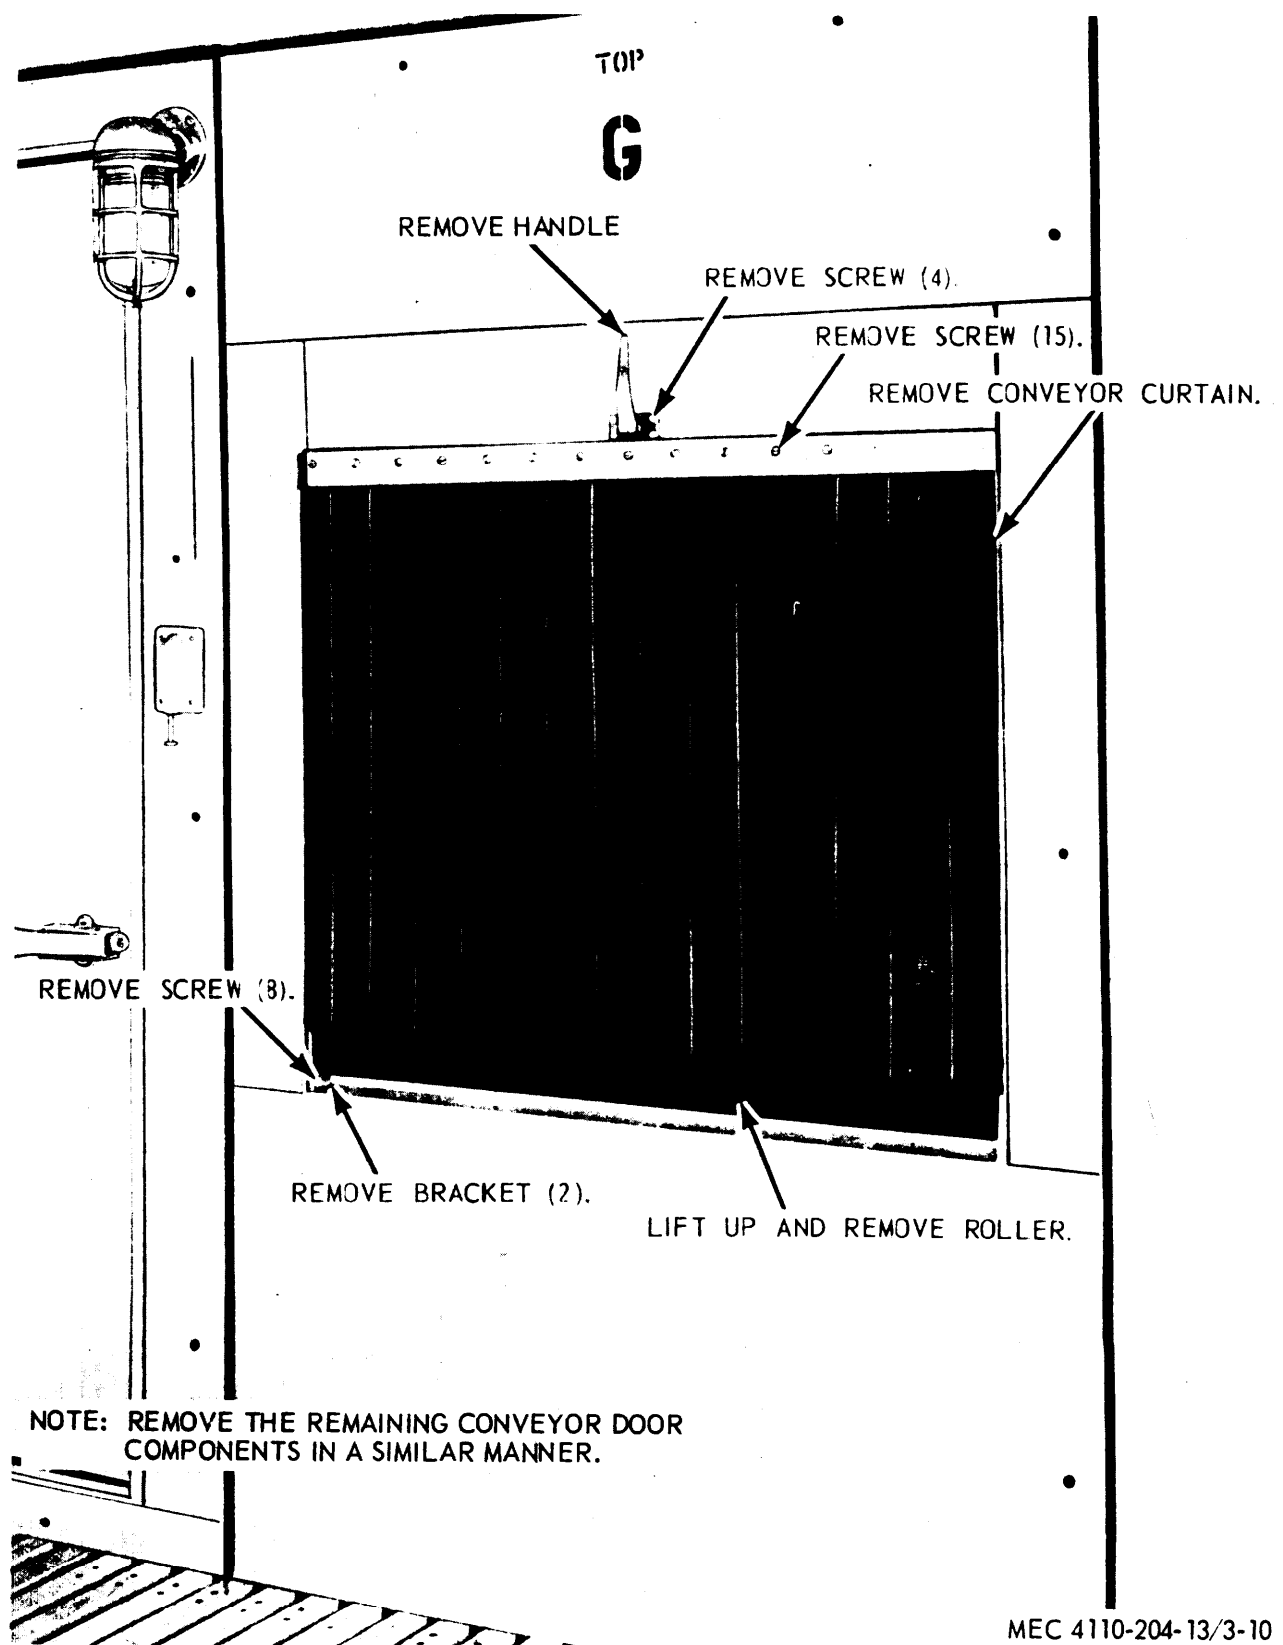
Conveyor door handle, roller and curtain, removal and installation
